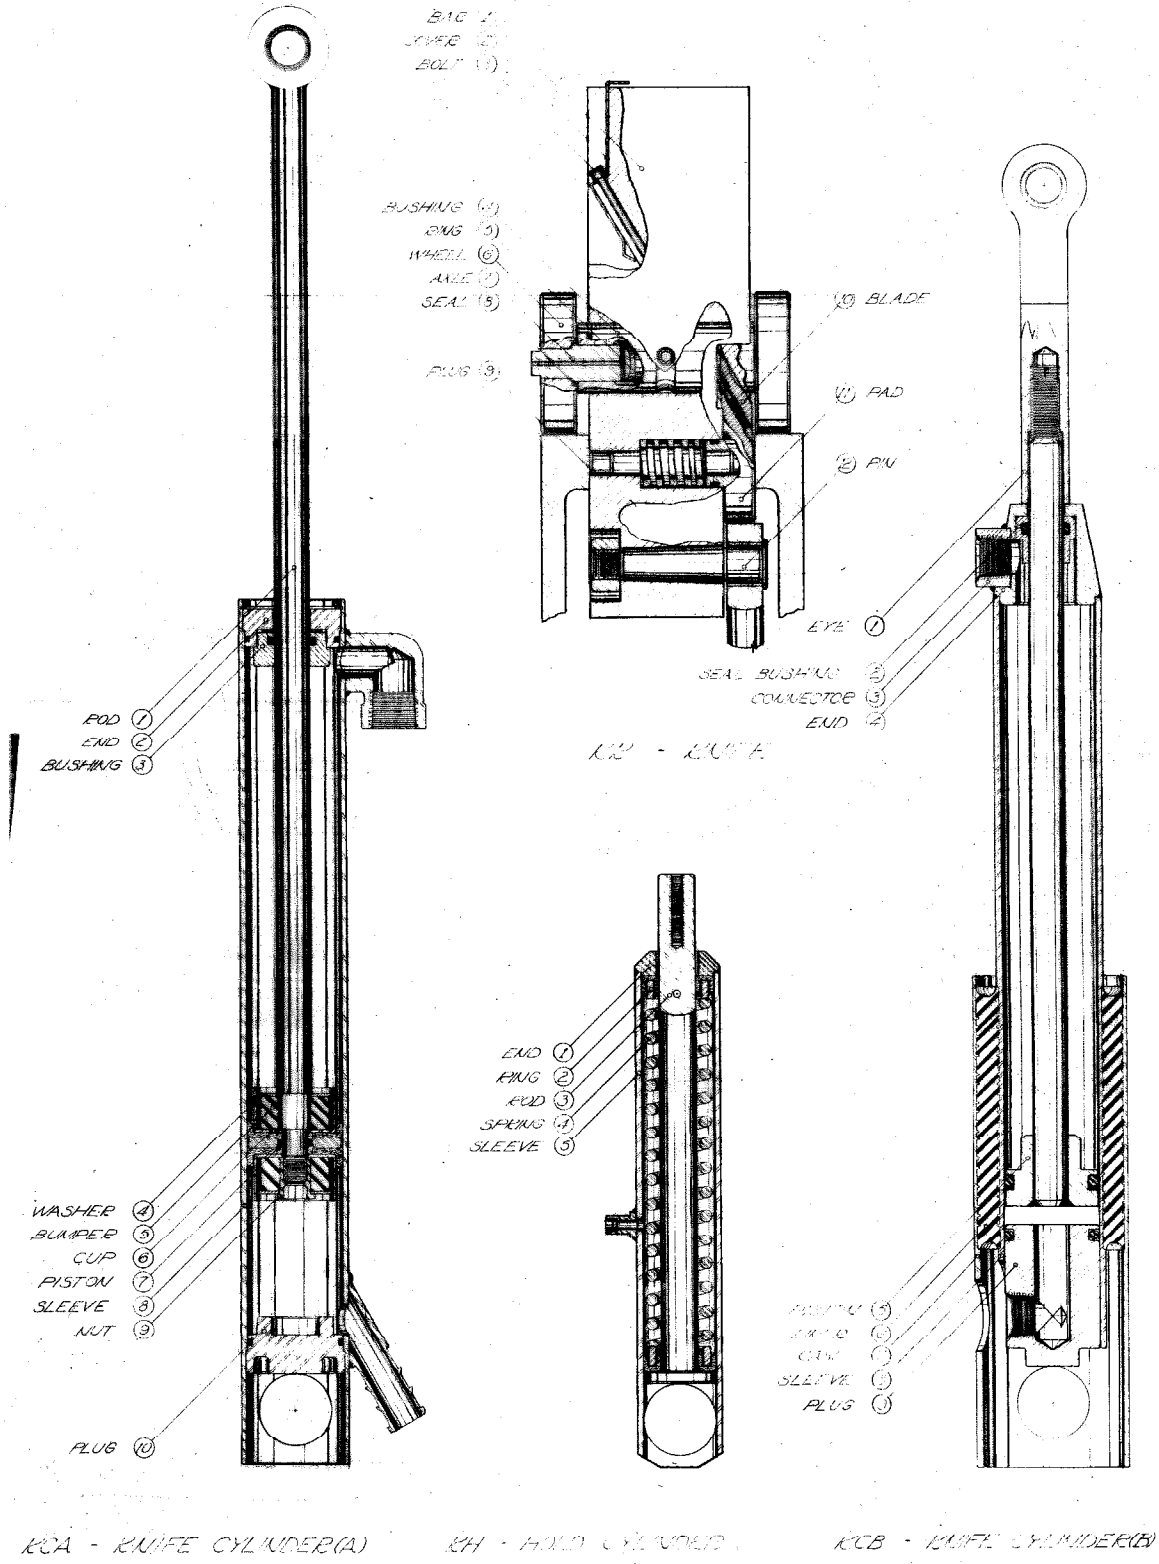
Knife Subassemblies - KK, KH, KCA, KCB
